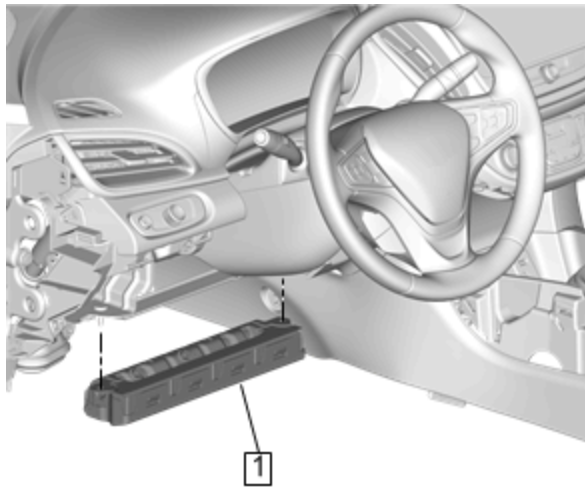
Instrument Panel Lower Airbag - Driver Side
